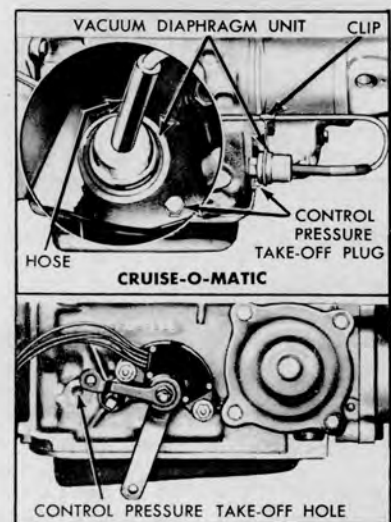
Vacuum Diaphragm and Control Pressure Checking Point
